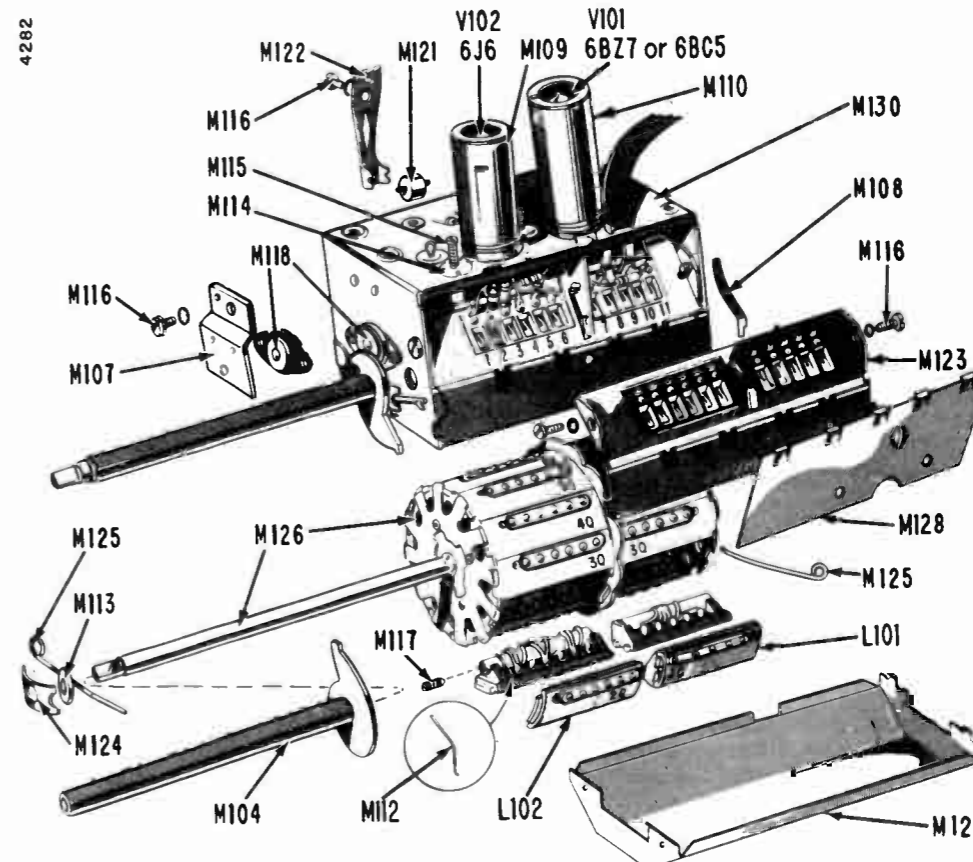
Exploded View. TV Tuners 94D52-1, 94D52-2, 94D46-2 and 94D46-3. For description of parts, see page 14.
